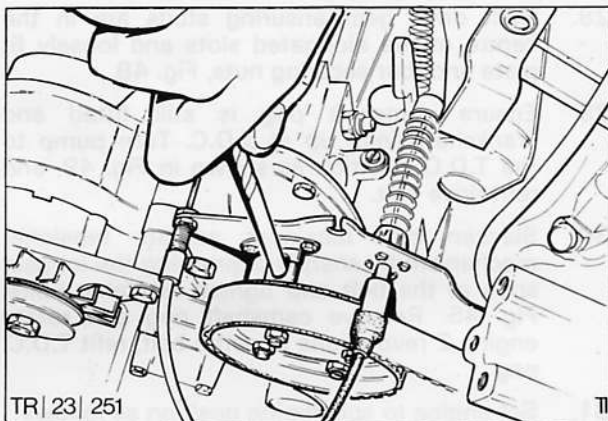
Injector pump set at spill timing using an 8 mm twist drill to line-up hole
